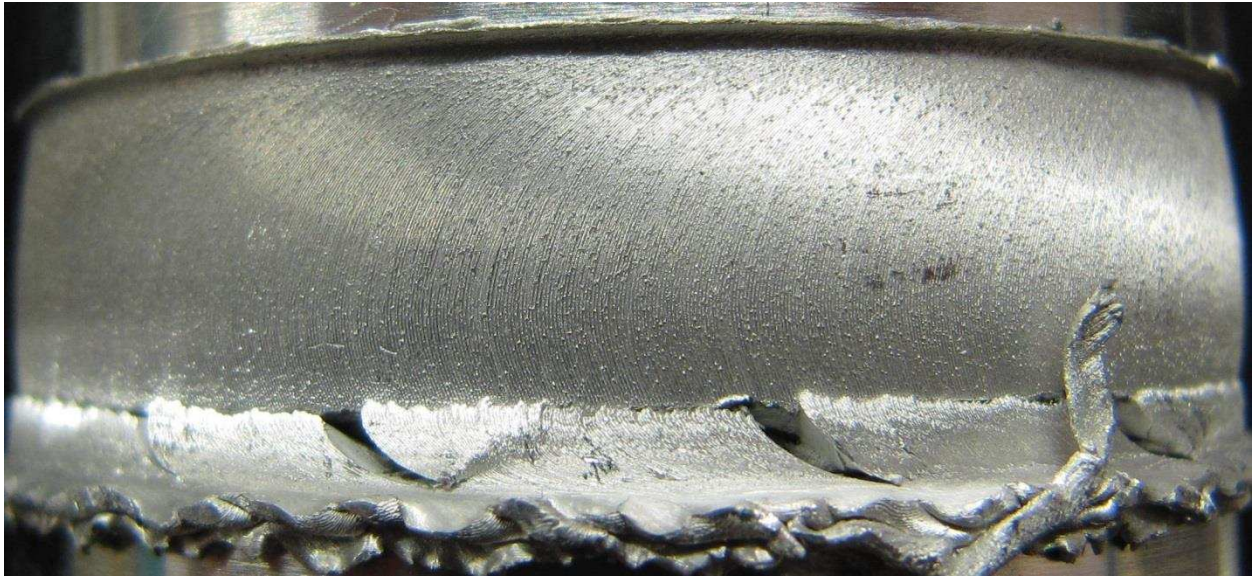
Multiple crack initiation sites observed in torsion fatigue at  $R = 0$ . This image shows specimen T23.
